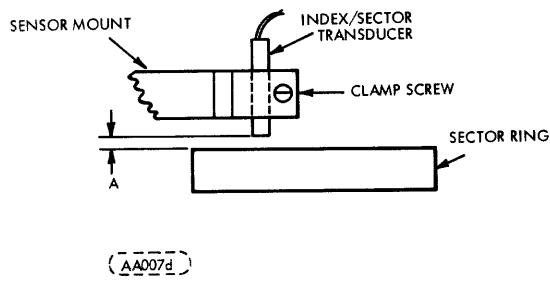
FIXED DISK INDEX/SECTOR TRANSDUCER ADJUSTMENT
